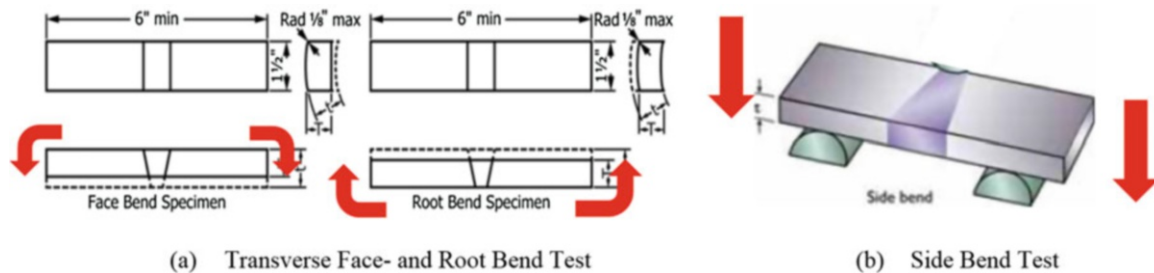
Transverse face and root and side bend test (ASTM A370). (a) Transverse face and root bend test. (b) Side bend Test
